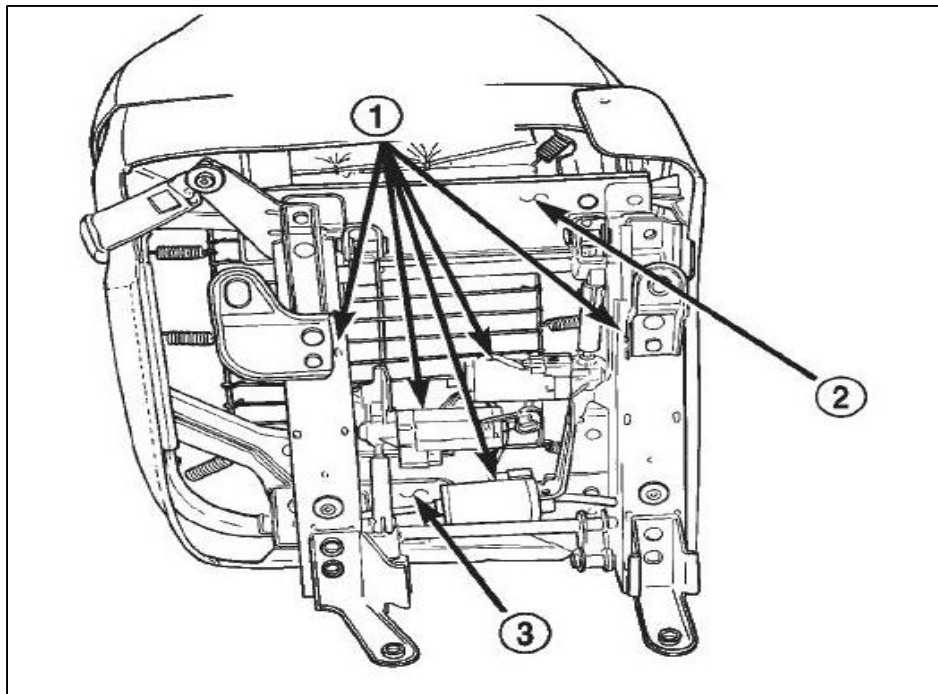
Back position of Power Seat Adjuster and Motor remove/Install
